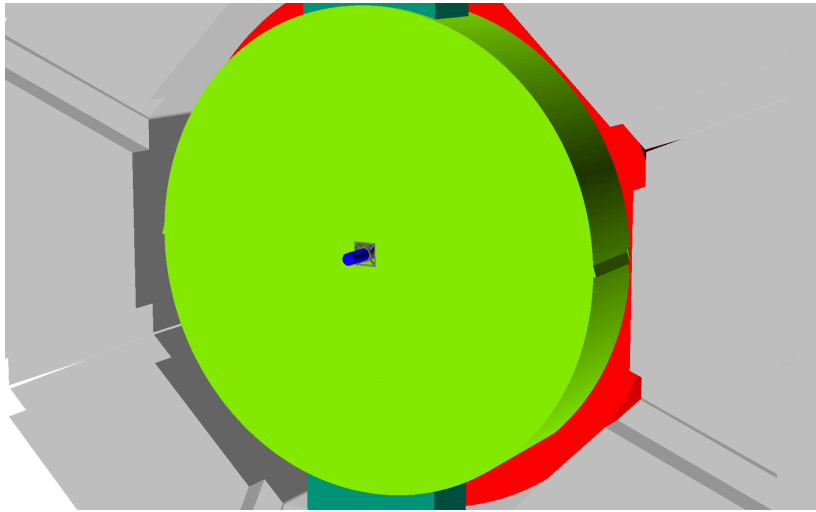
Mounting the clamp that holds the beampipe in the middle of the central hole of the ECal endcap. The clamp is fixed to the edges of the hole.
